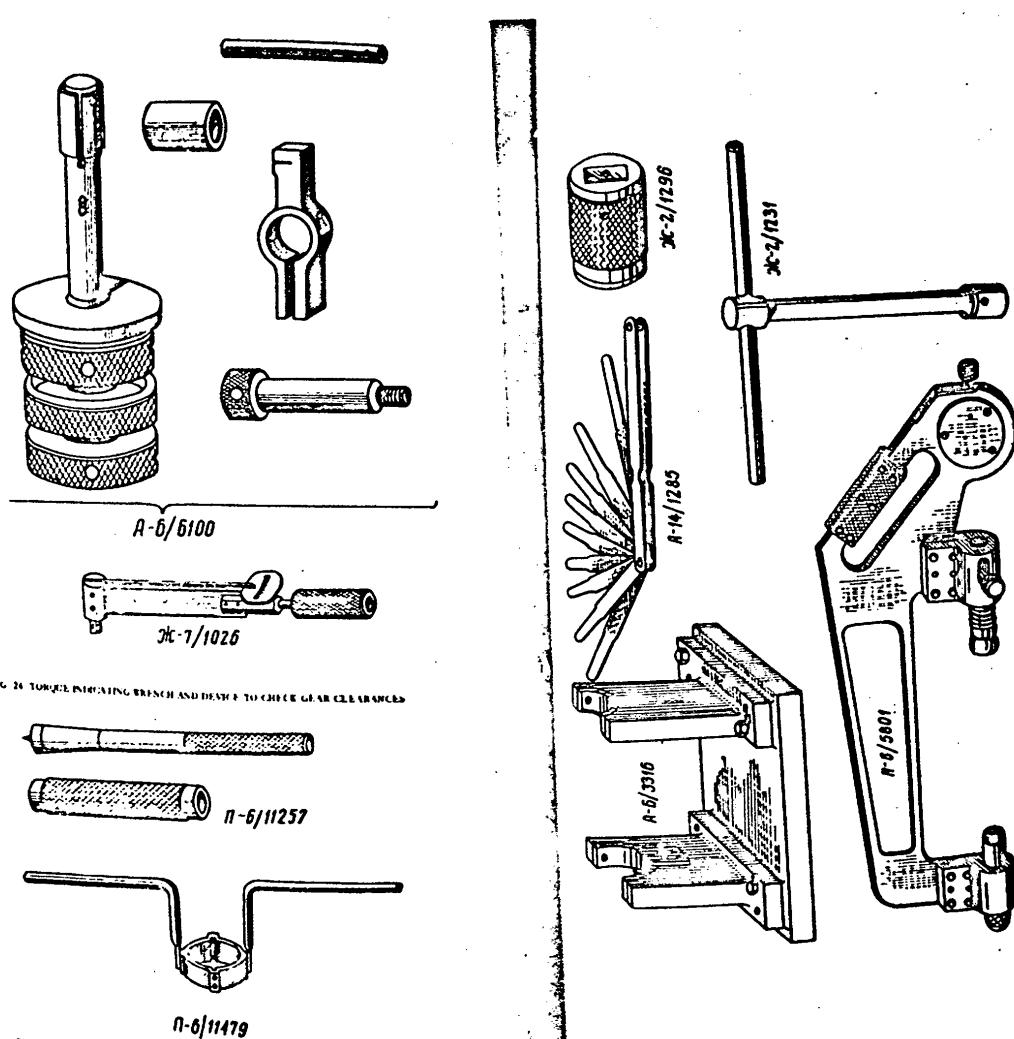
TORQUE INDICATING WRENCH AND DIALS TO CHECK GEAR CLEARANCES
